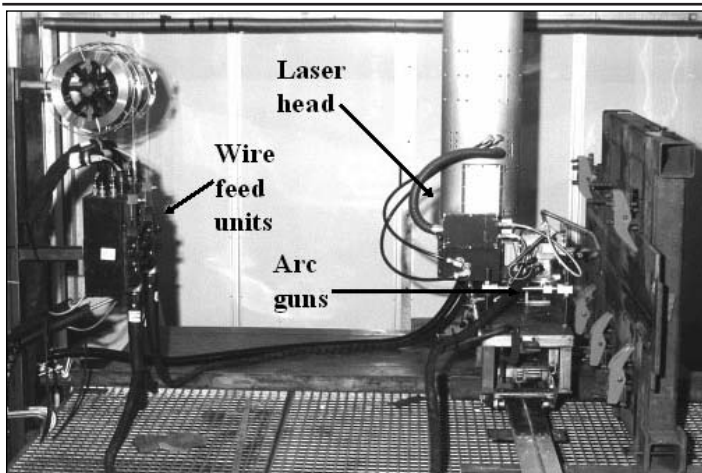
Experimental arrangement for hybrid welding equipment. Welding was carried out in the horizontal/vertical position to prevent gravity from promoting weld pool sagging and drop out.
